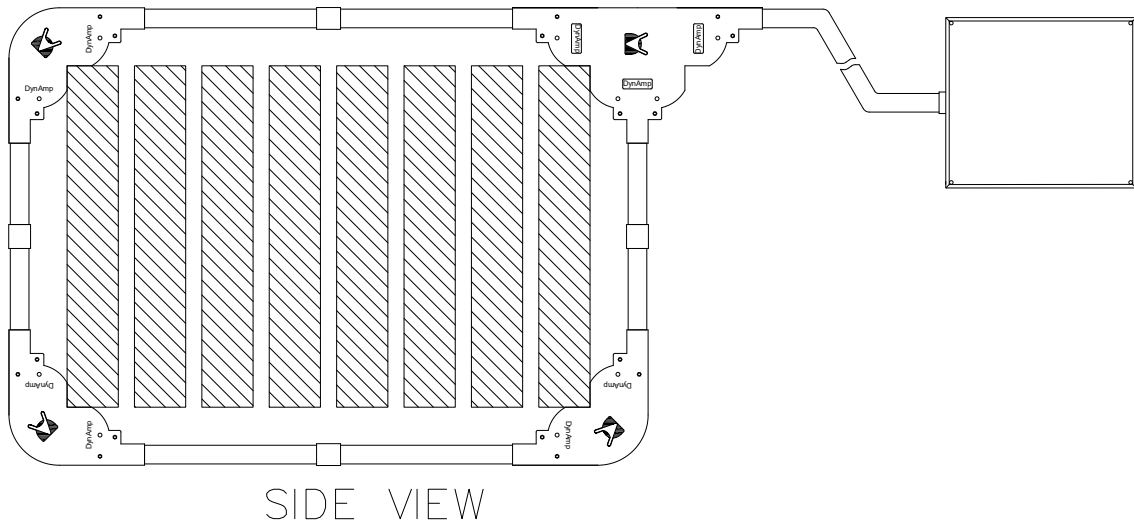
Corner Notch Mounting on a Horizontal Bus
